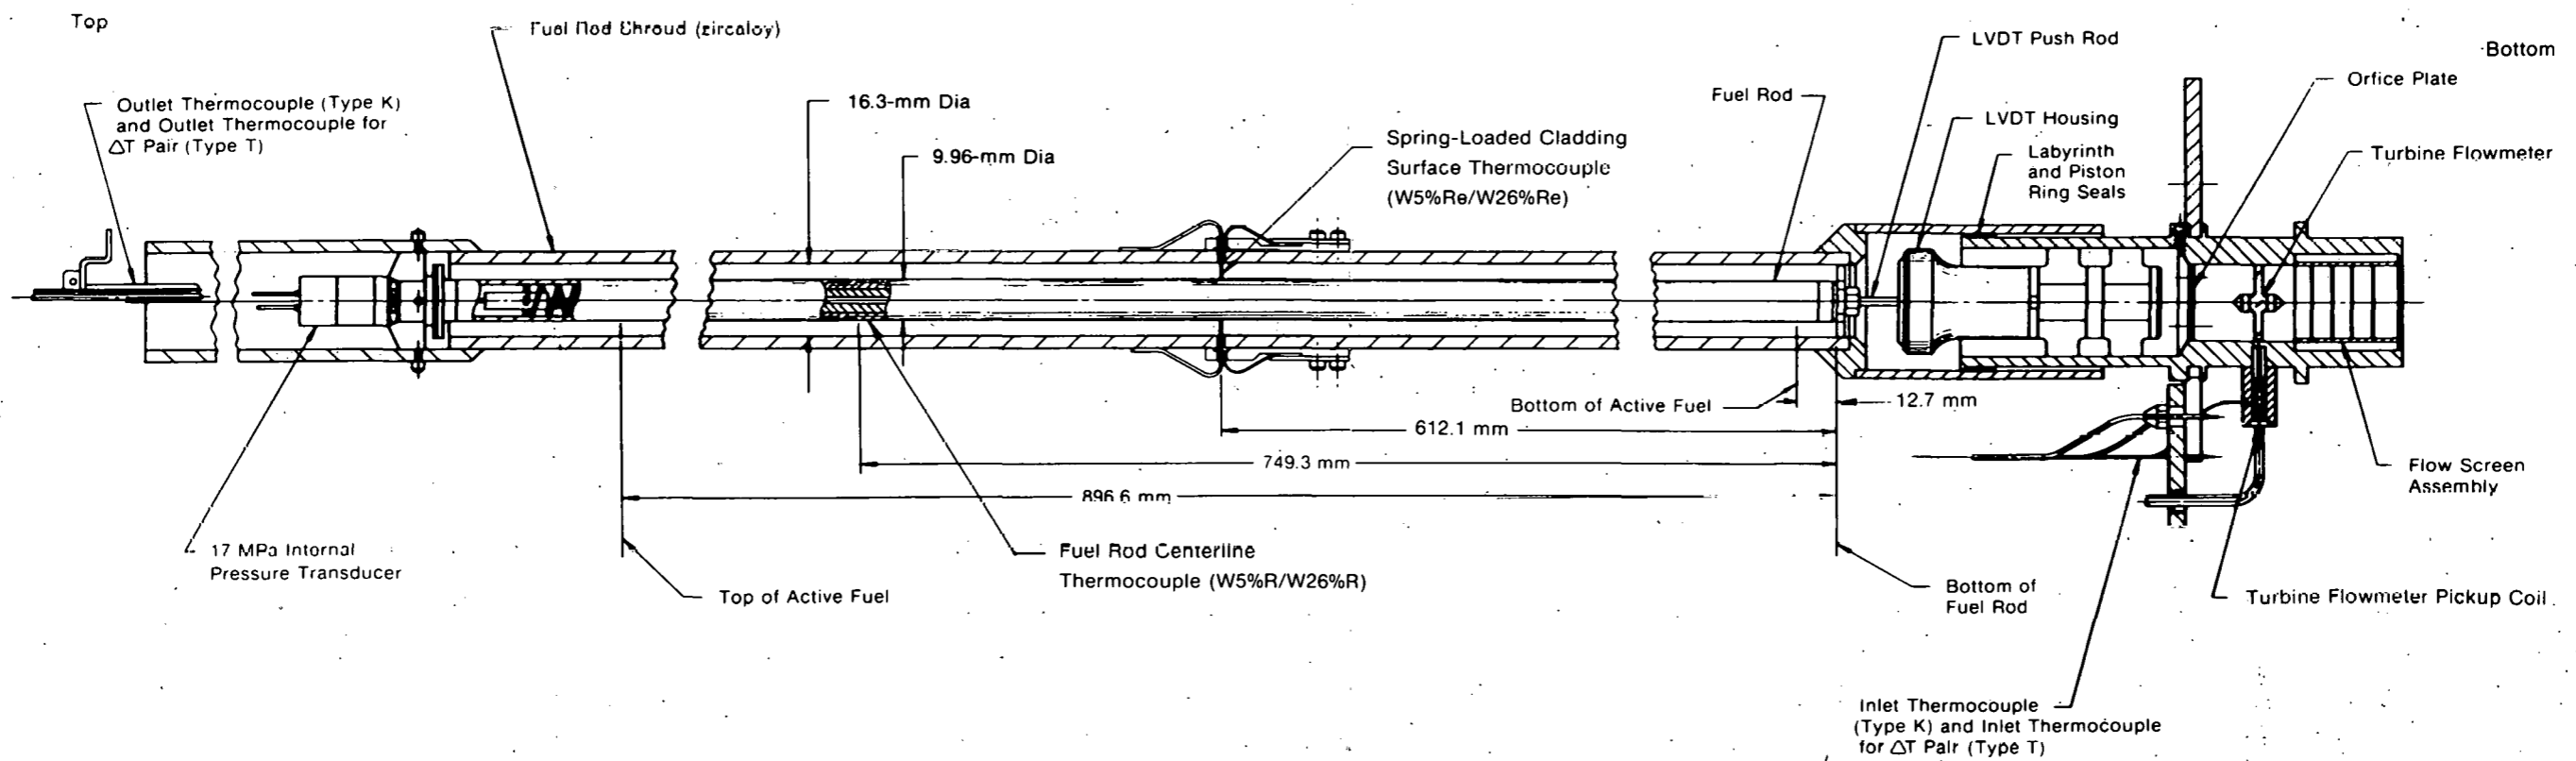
Typical instrumented fuel rod for Test IE-2, shown installed in a flow shroud.
